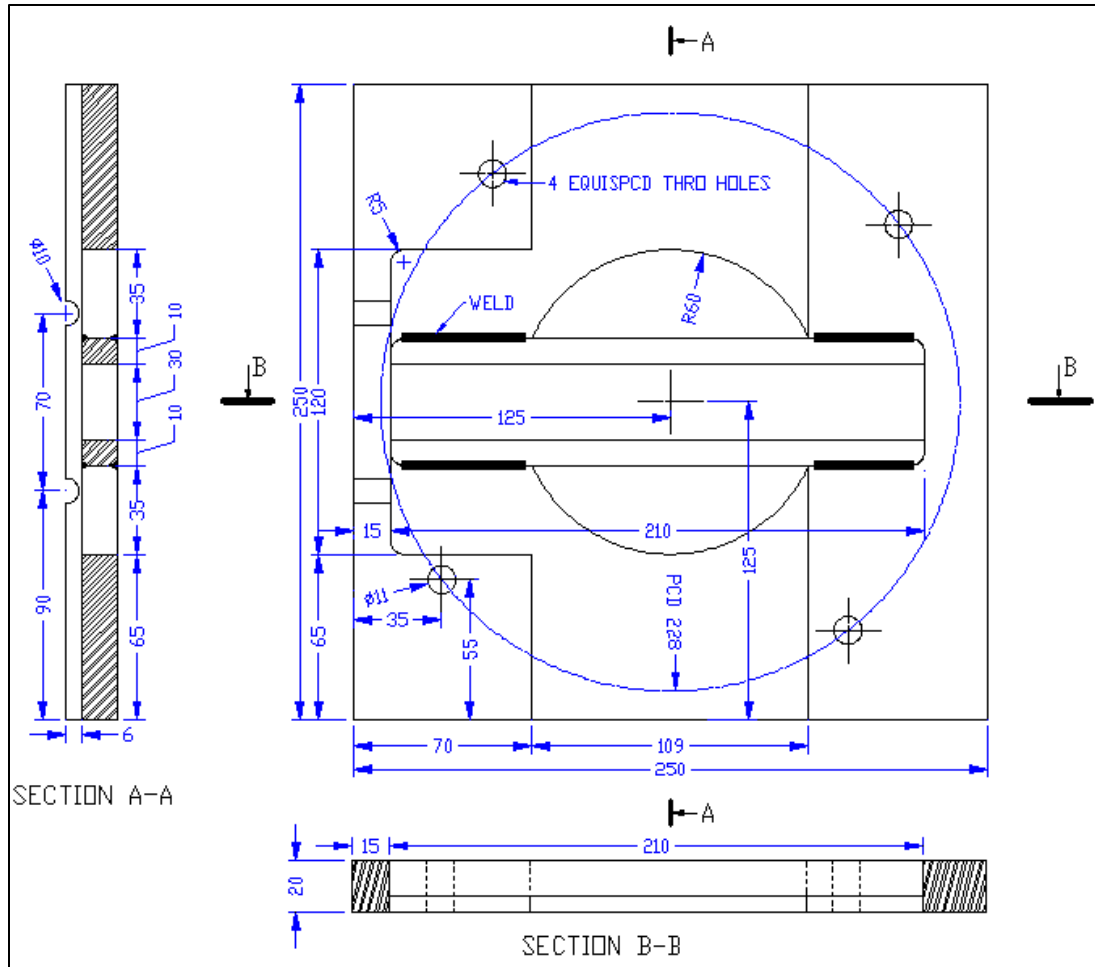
Top plate for welding fixture (Dimensions in mm)
